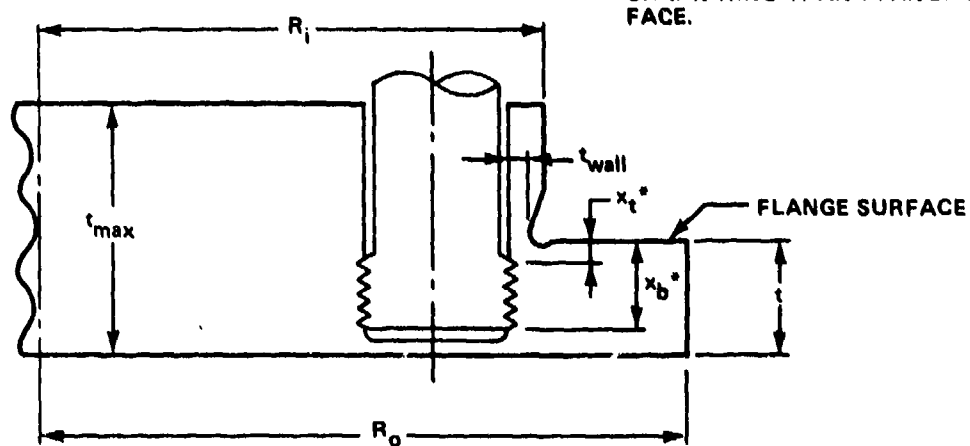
Dimensions Used in Table 3 for Crank Ring
